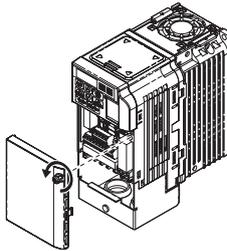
Remove the Front Cover on an IP20/NEMA Type 1 Drive
